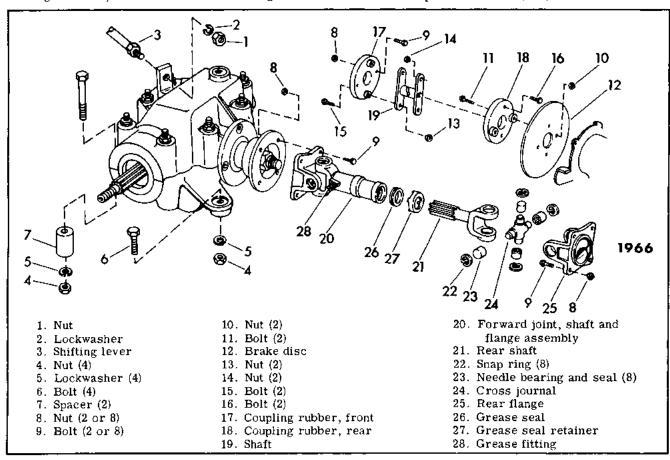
D-40. Reversing Unit and Coupling - Exploded View
